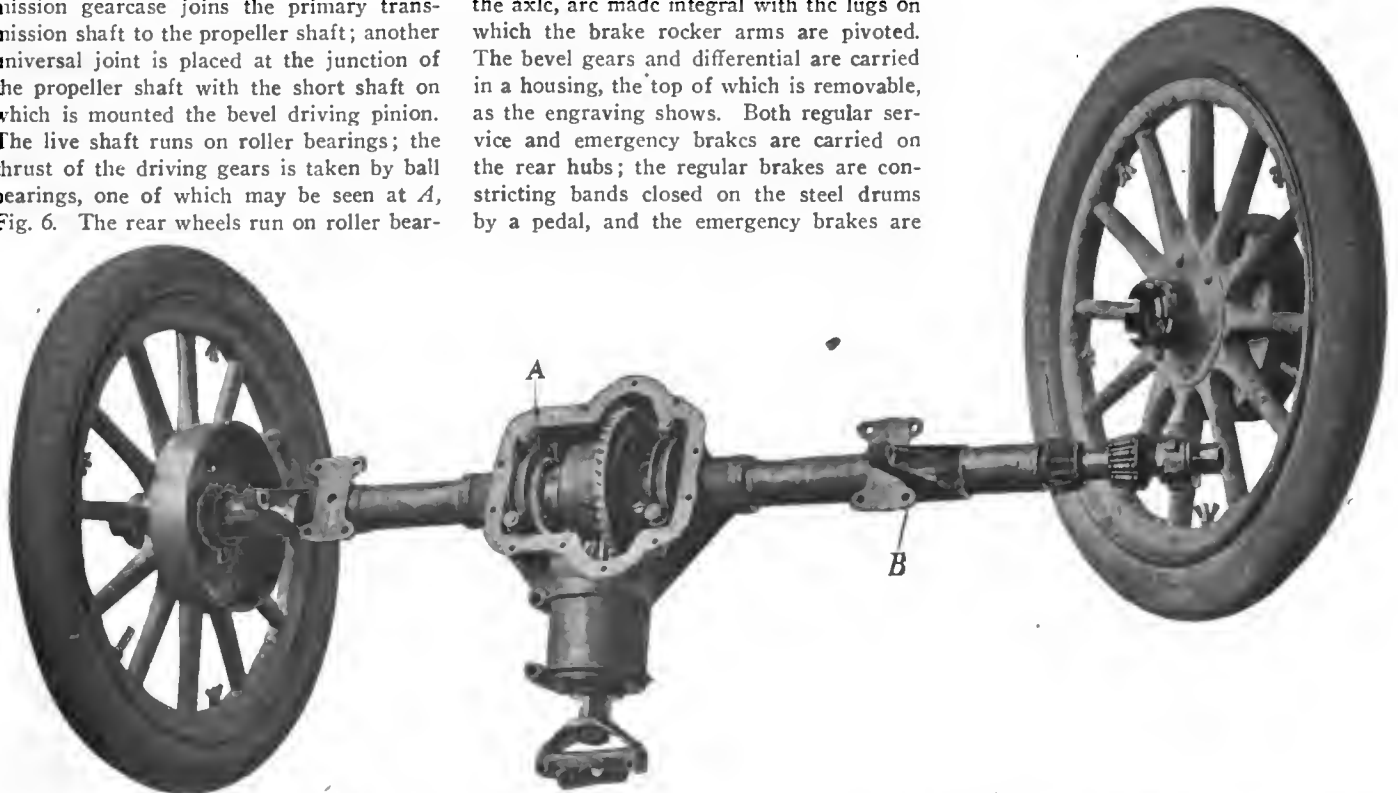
REAR AXLE AND WHEELS OF COLUMBIA MARK XLVI CAR, SHOWING ROLLER BEARINGS AND LIVE AXLE DRIVE TO OUTSIDE OF WHEEL. A—Adjusting Collar for Ball Bearings. B—Spring Block and Brake Lug.
